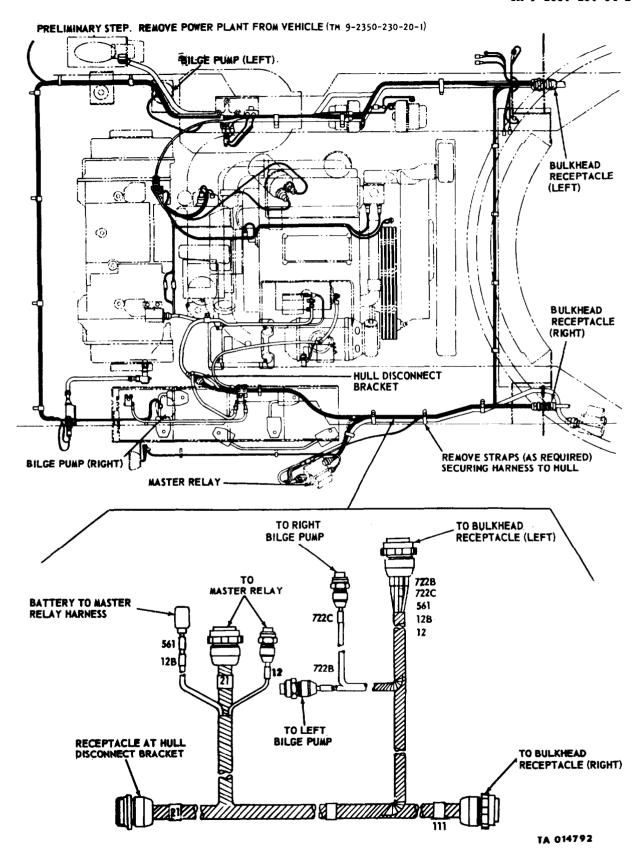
Removal/installation-engine disconnect-to-master relay wiring harness
